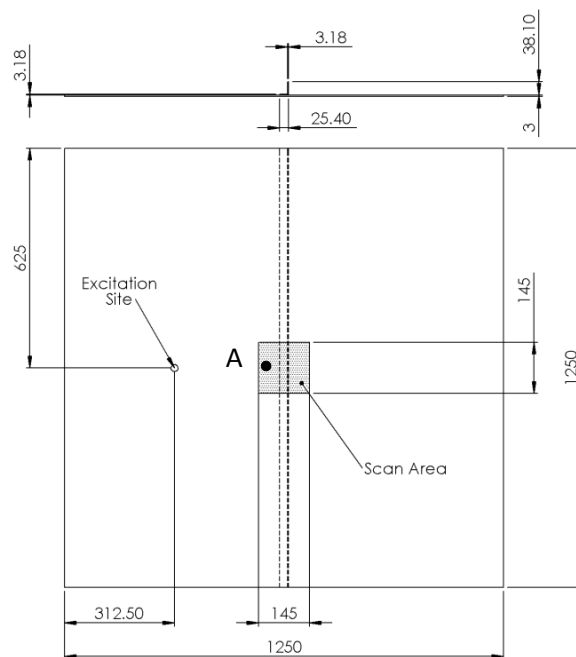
Dimensions of the stiffened panel (all dimensions in mm).
